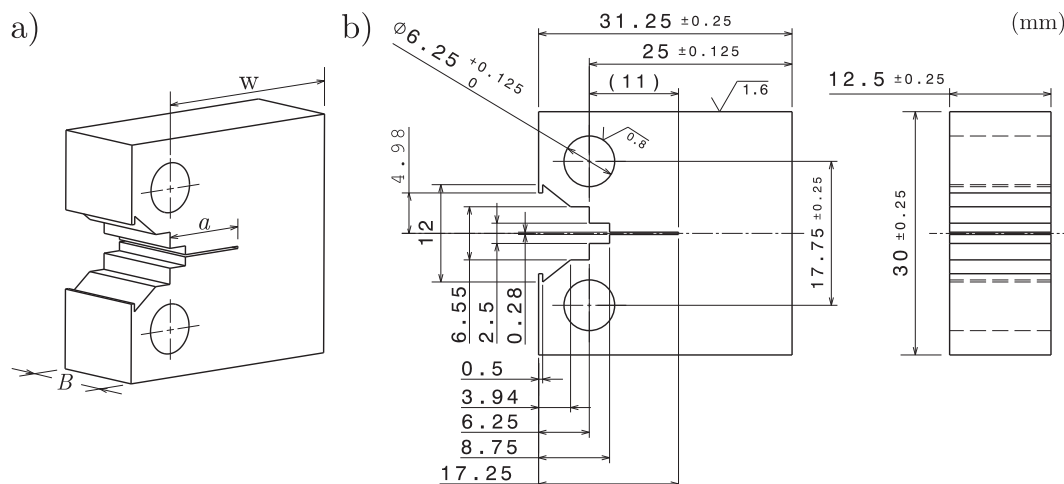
The geometry of the compact tension specimen used for isothermal fatigue crack propagation (a) isoparametric view showing the variables W , B , and a ; (b) detailed drawing.
